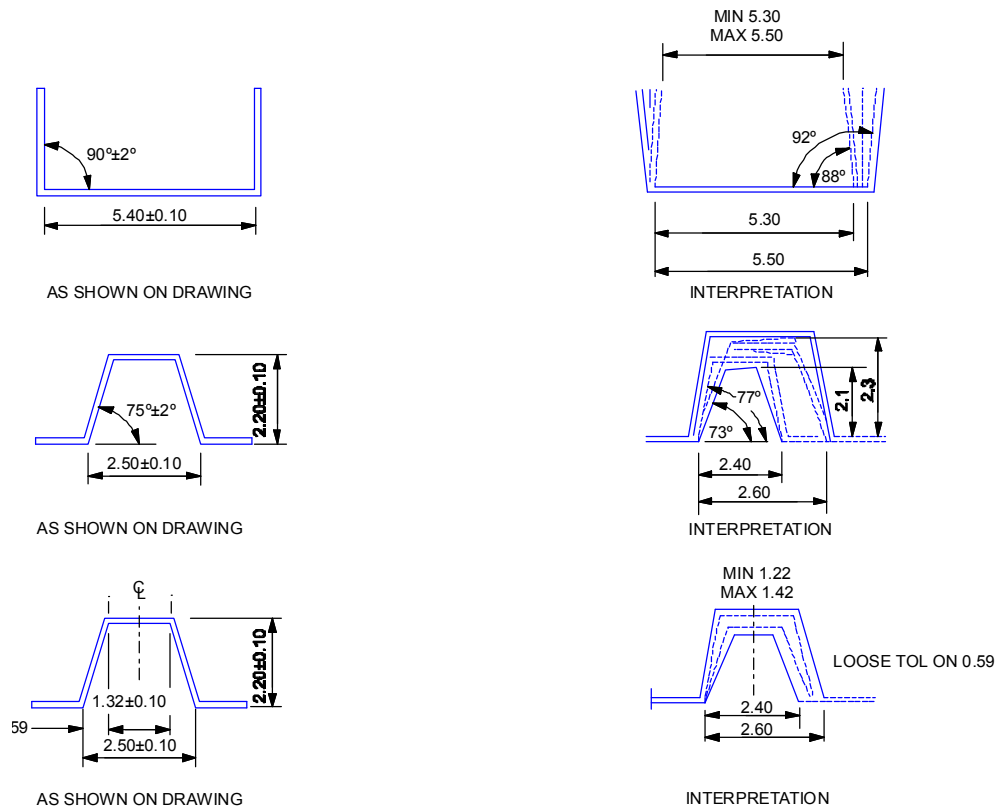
Interpretation of tolerances on roll formed sections
